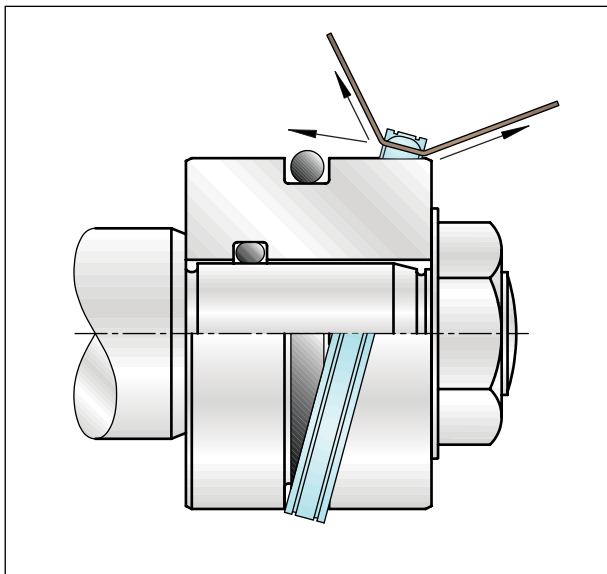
Fitting the seal ring onto the O-Ring in the groove, using a thin plastic strip
